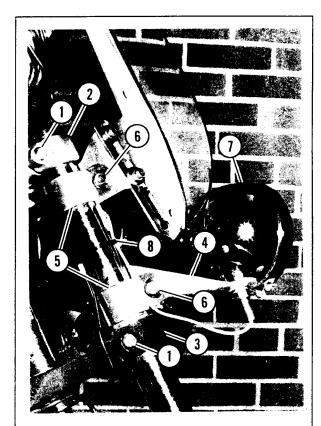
FXRP-Windshield -- Original Windshield Mounting Hardware and Front Fork Pinch Screws --Right Side
